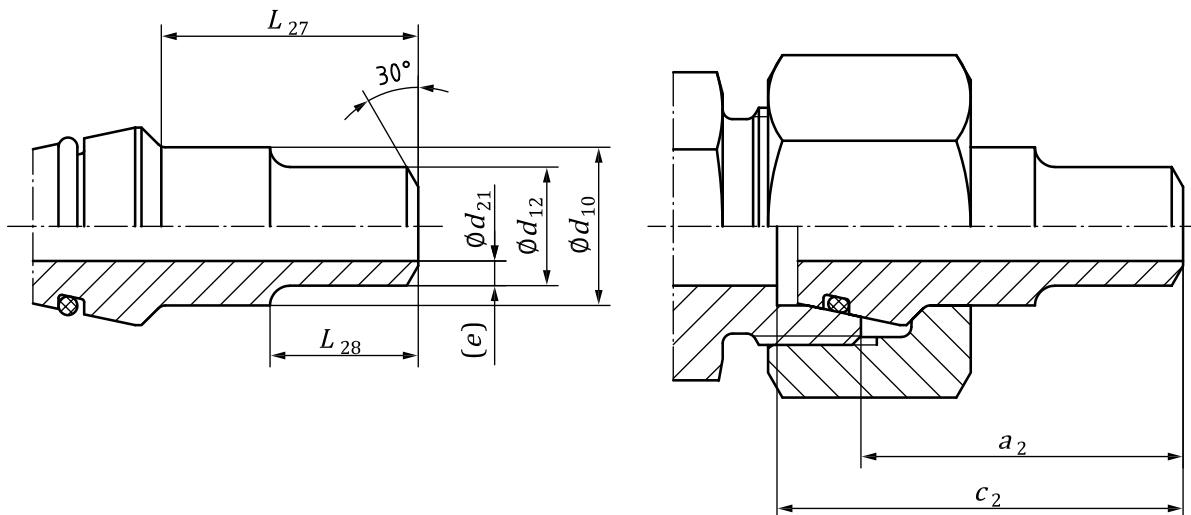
Weld-on reducing nipple (WDRDNP)
